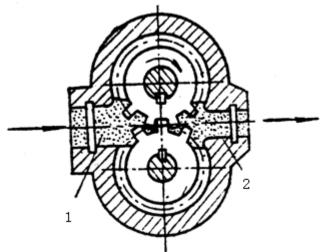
Working principle of gear pump (1) Oil suction cavity (2) Oil pressing cavity
